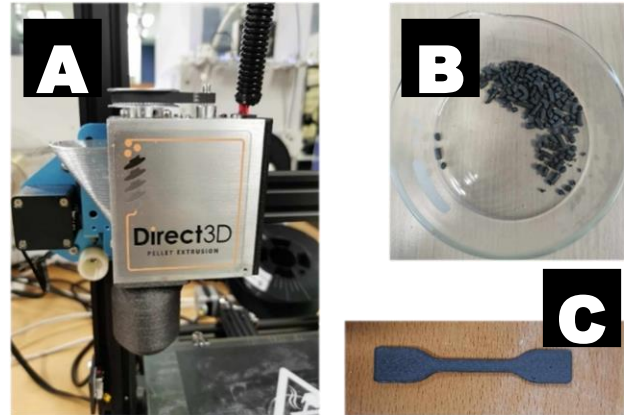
(A) 3D pellets printers, (B) Feedstock for 3D printing and (C) the specimen printed by pellets additive manufacturing process
